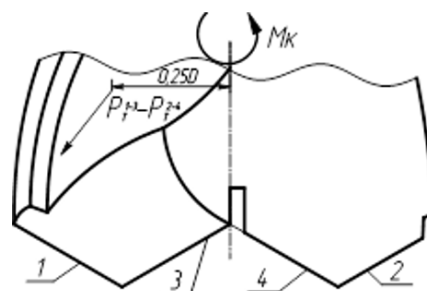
Torque and shear force when working with a double-edge drill without a cross edge.
